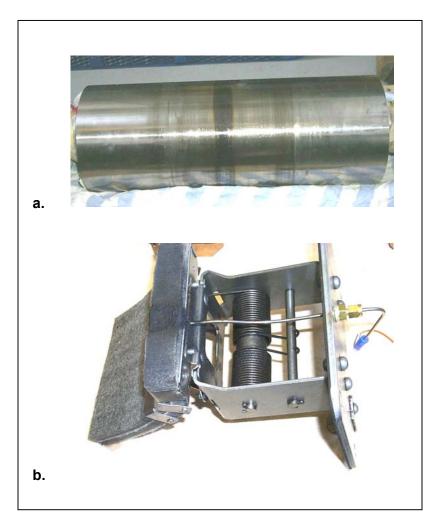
Damaged Mark 2 Vespel®-lined bearing (larger bore)a. shaftb. wick
